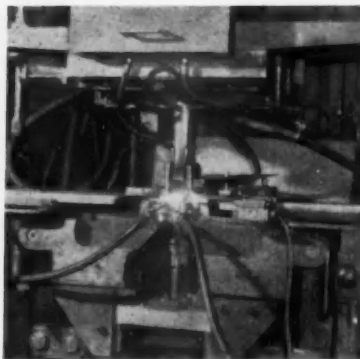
Note universal fixturing table and simple dies used for welding a yoke assembly.
